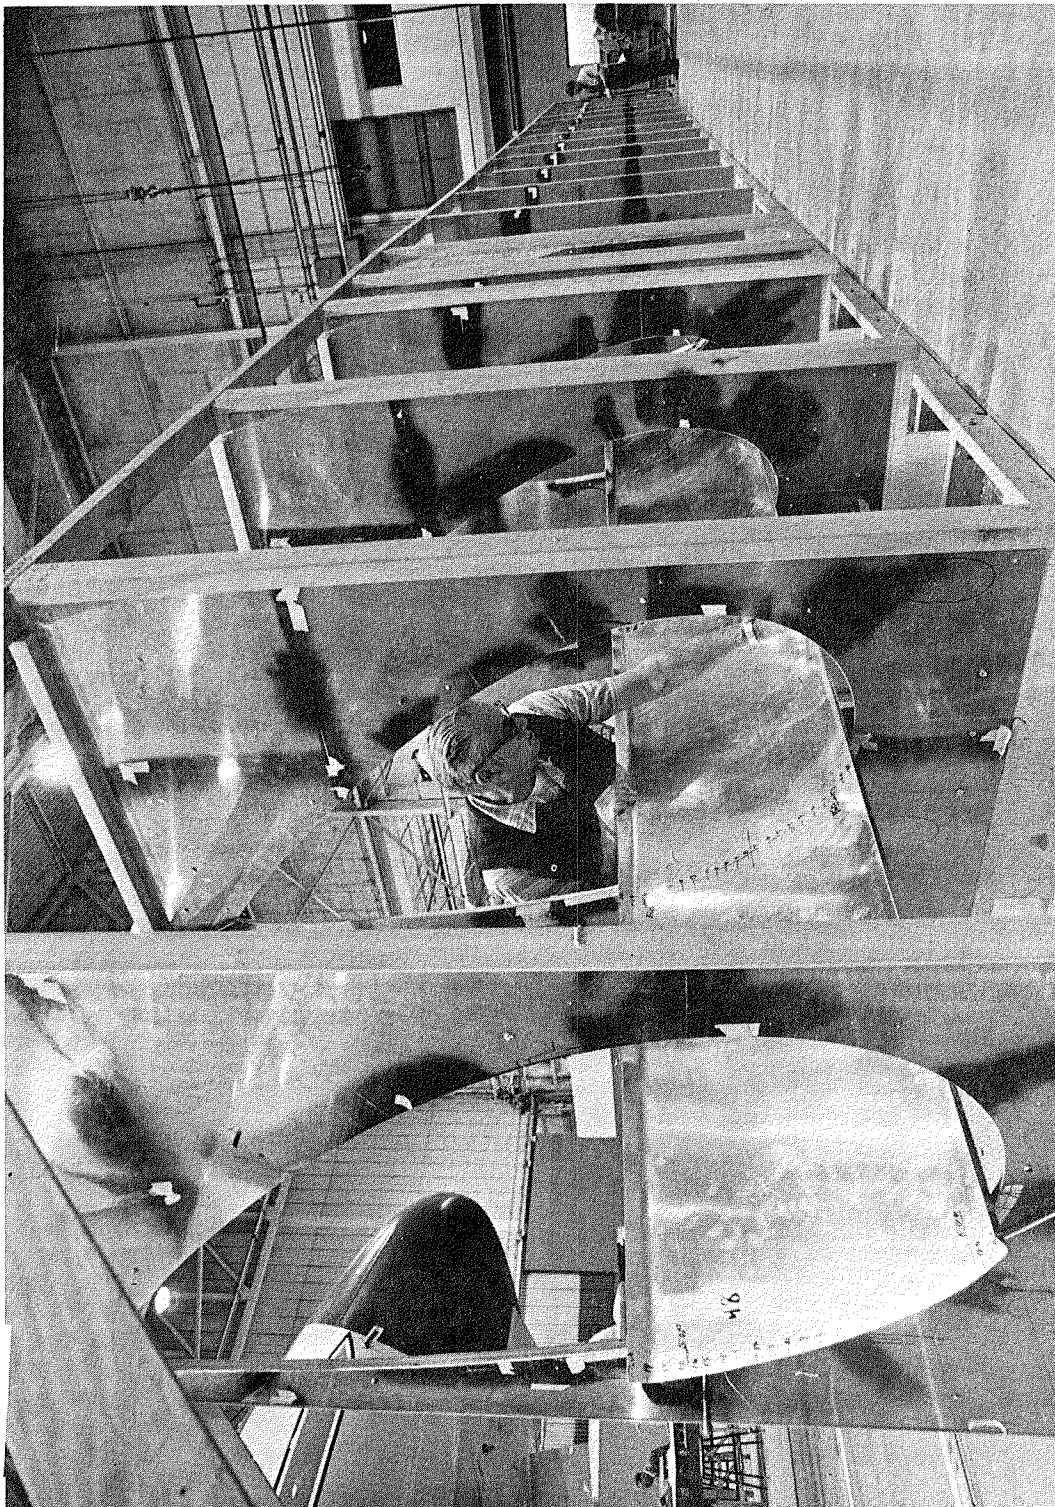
A. Blade Fixture Jig Showing Length, Twist and Contour Check Points
